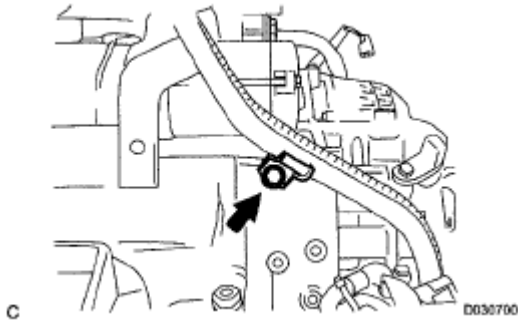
Locating Transmission Oil Filler Tube Clamp Bolt
